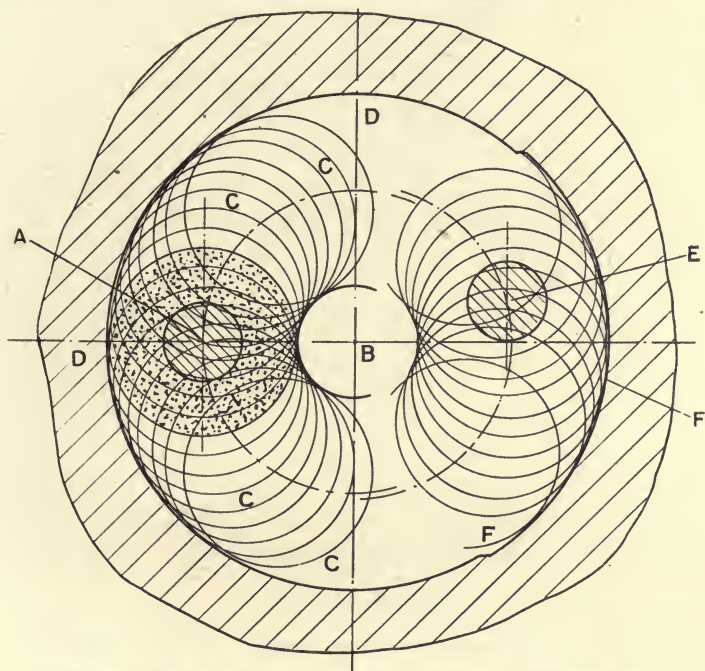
MOVEMENT AND FEED IN CYLINDER GRINDER HEAD
